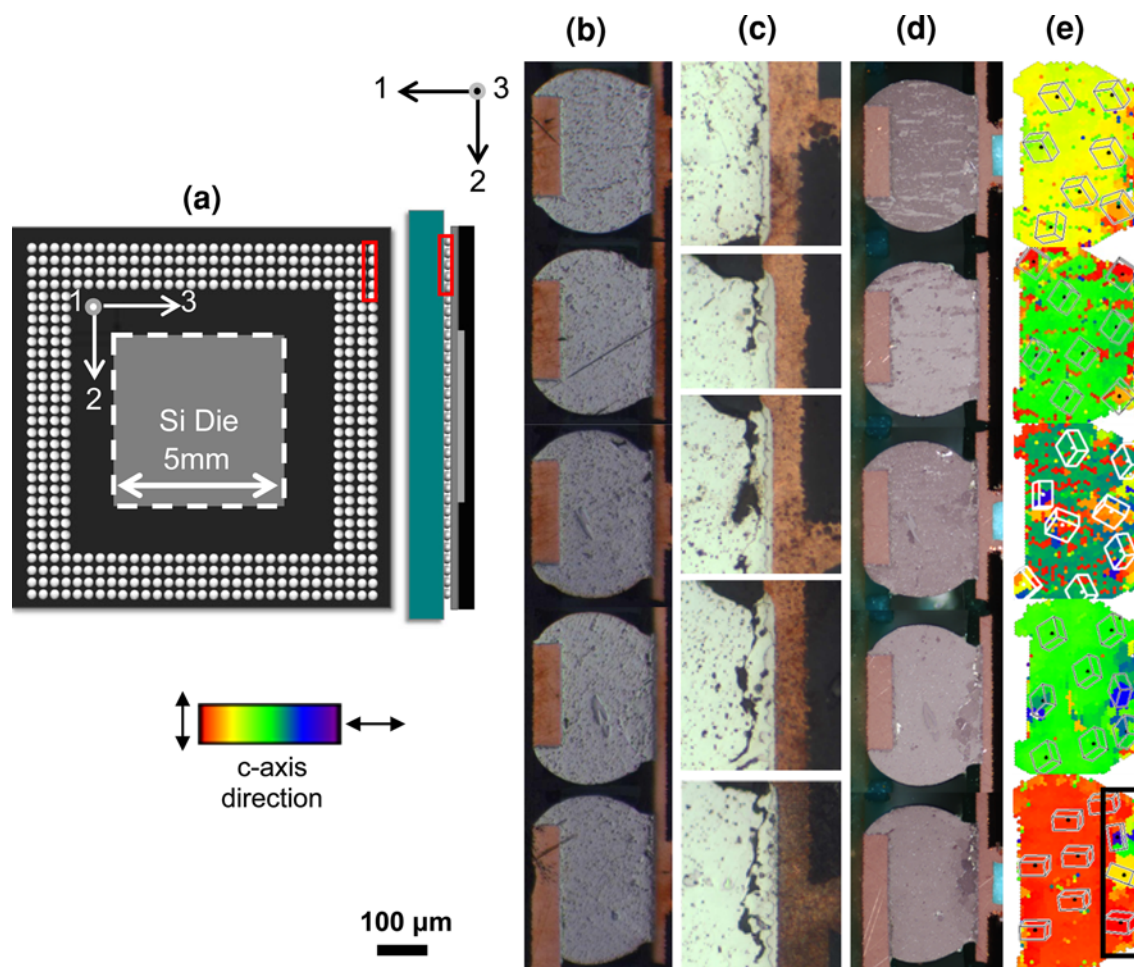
Fine-pitch (0.4 mm) BGA package with SAC305 solder joints and a small Si die: (a) plan view (looking from the substrate to the chip) and cross-section view of the package; five solder joints at the outermost row are highlighted, and the strain tensor coordinate system is shown inset; (b) optical micrographs; (c) magnified optical images show cracks at the package side; (d) cross-polarized light micrographs; (e) *c*-axis EBSD maps. The interface between ball 5 and the package (black box) is shown in detail in Fig. 3.
